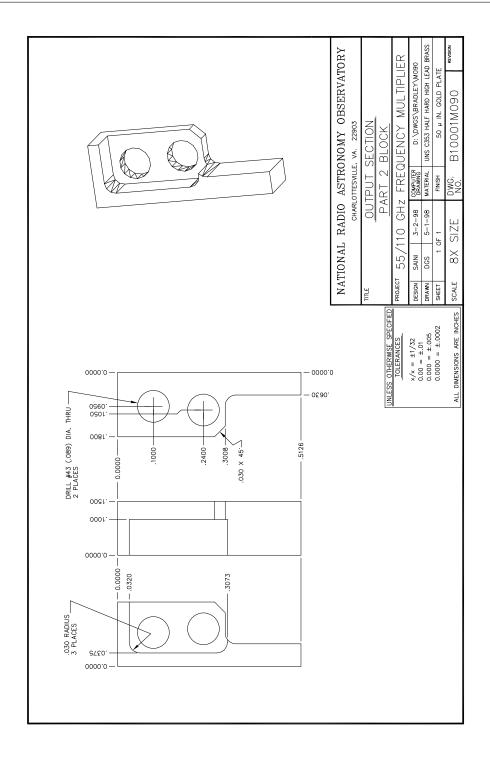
55/110 GHz frequency doubler: Mechanical details of the output section insert of part 2 of the two piece split block.
